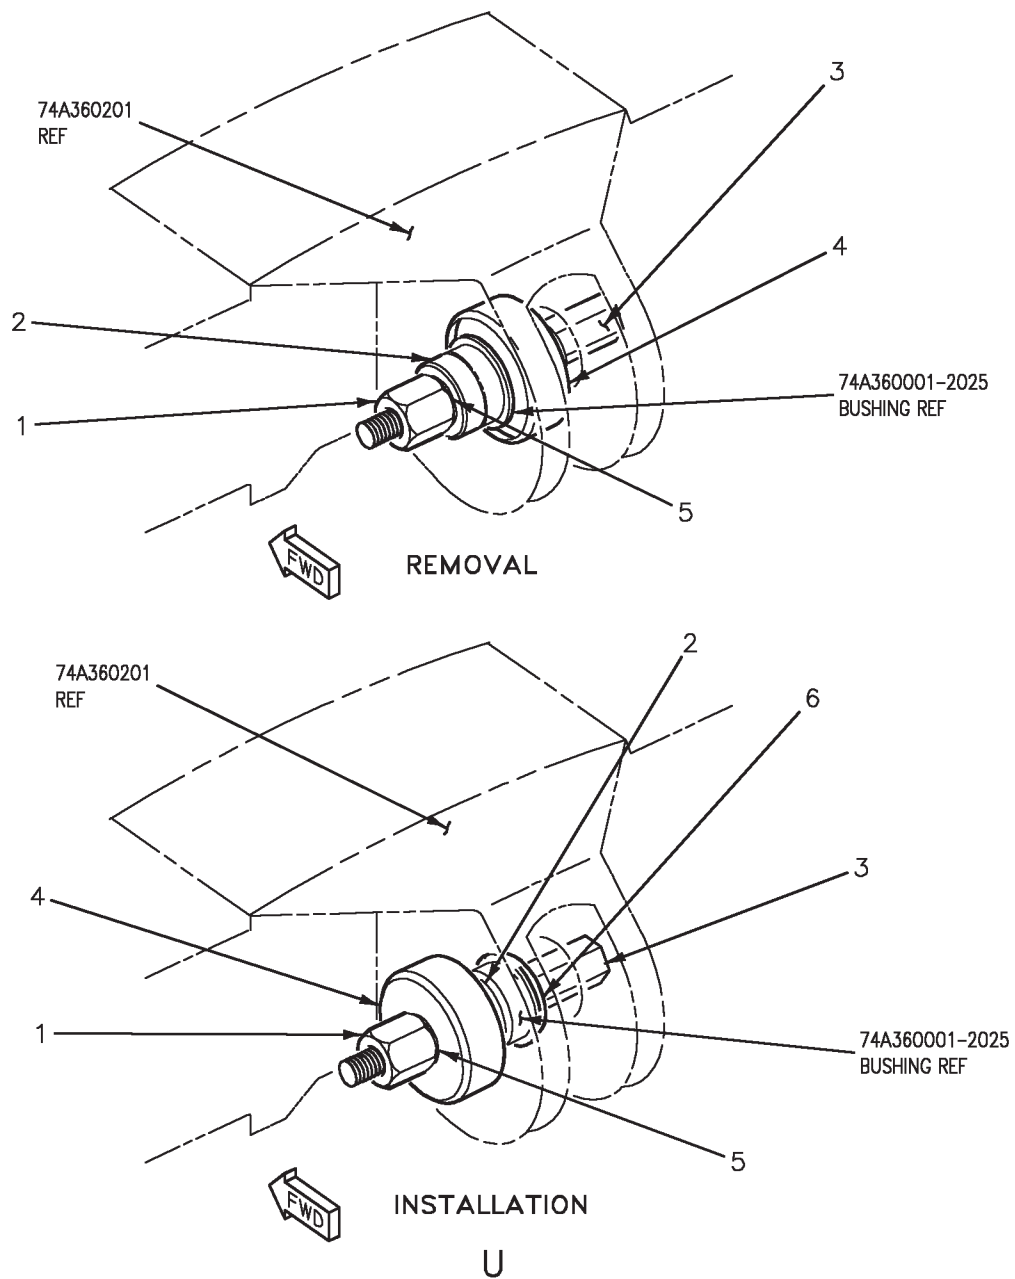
Bushing Removal, Installation, and Reaming (Sheet 33)
